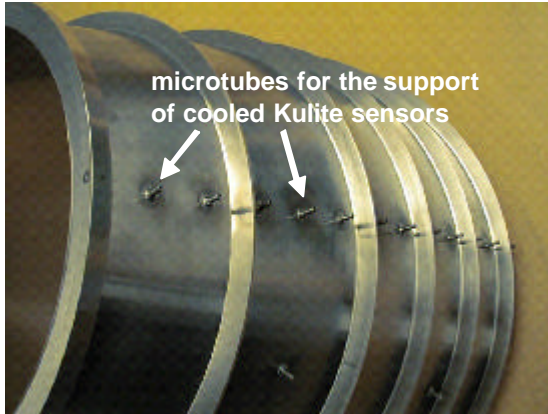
Calo nozzle assembly C, with actively cooled base nozzle and film-/radiation cooled metallic skirt.
